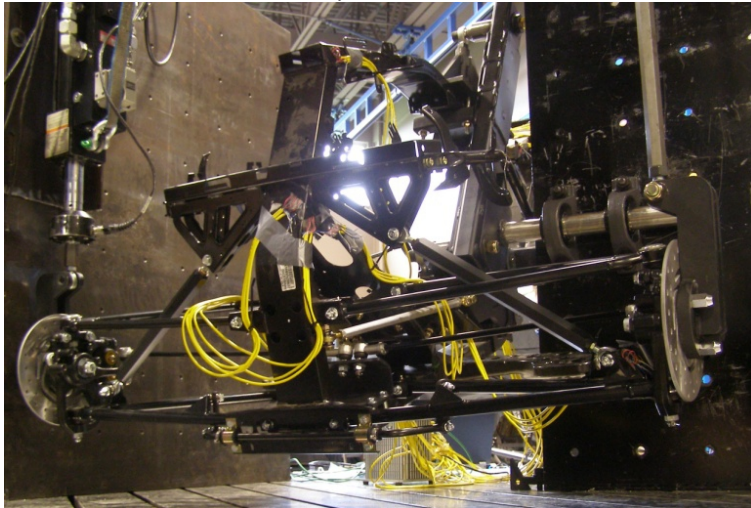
The mounting jig and frame on the tests machine (*Physical prototype*)
